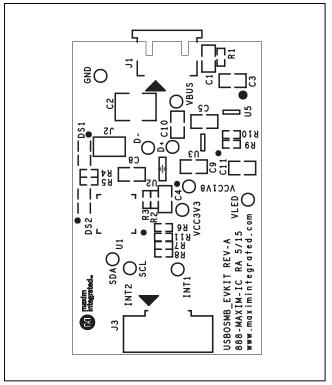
USBOSMB Mother Board Component Placement Guide—Component Side
